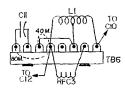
Sketch showing coil mounting. (TB_a is H. H. Smith 870).
